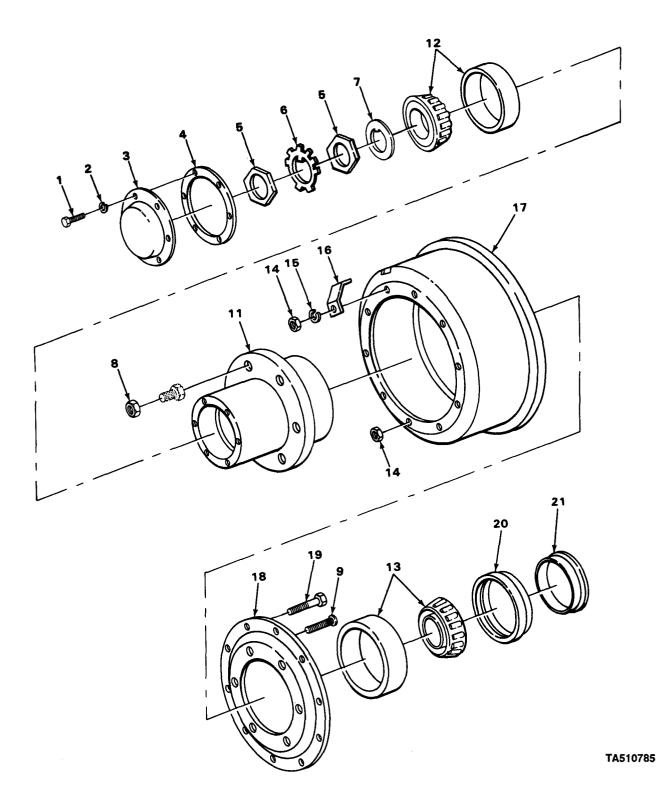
HUB AND BRAKEDRUM ASSEMBLIES.
